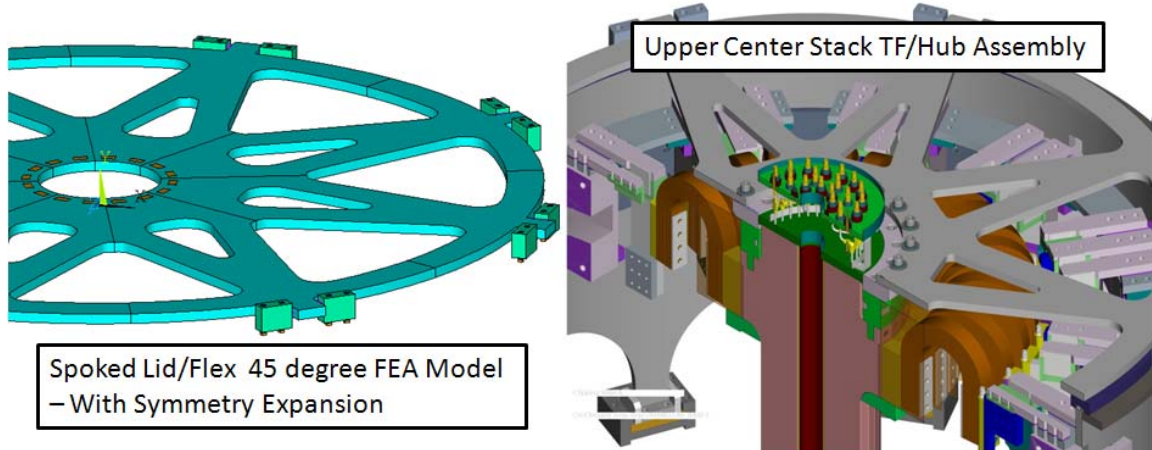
Earlier Upper Spoked Lid Model (left) and Machine Section (right)
